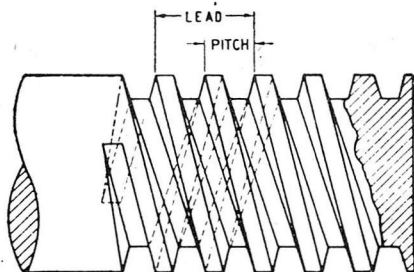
A Multiple Screw Thread Having Two Grooves (Double Thread)
